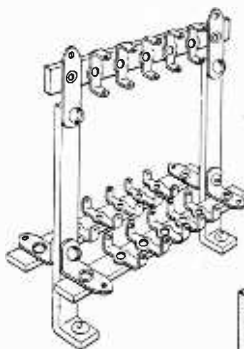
Group-board assembly for mounting components vertical to the chassis.
